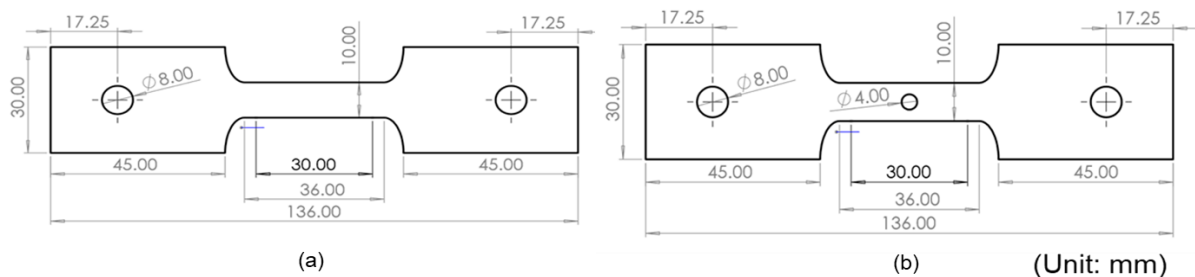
DIMENSIONS OF THE MODIFIED A30 TENSILE SPECIMENS (A) WITHOUT HOLE (B) WITH HOLE
